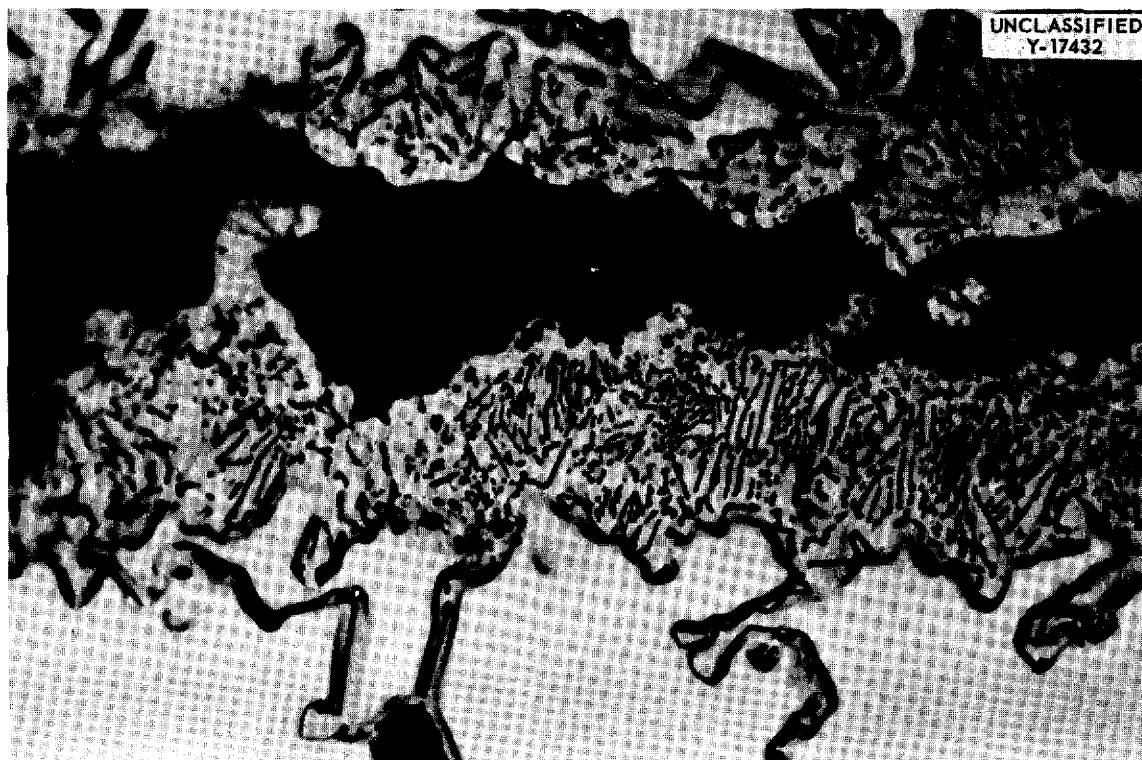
Section Through a Fracture Area of a Commercial Hastelloy W Billet Extruded at 2000°F. Eutectic structure may be seen adjacent to the fracture. 2000X.
